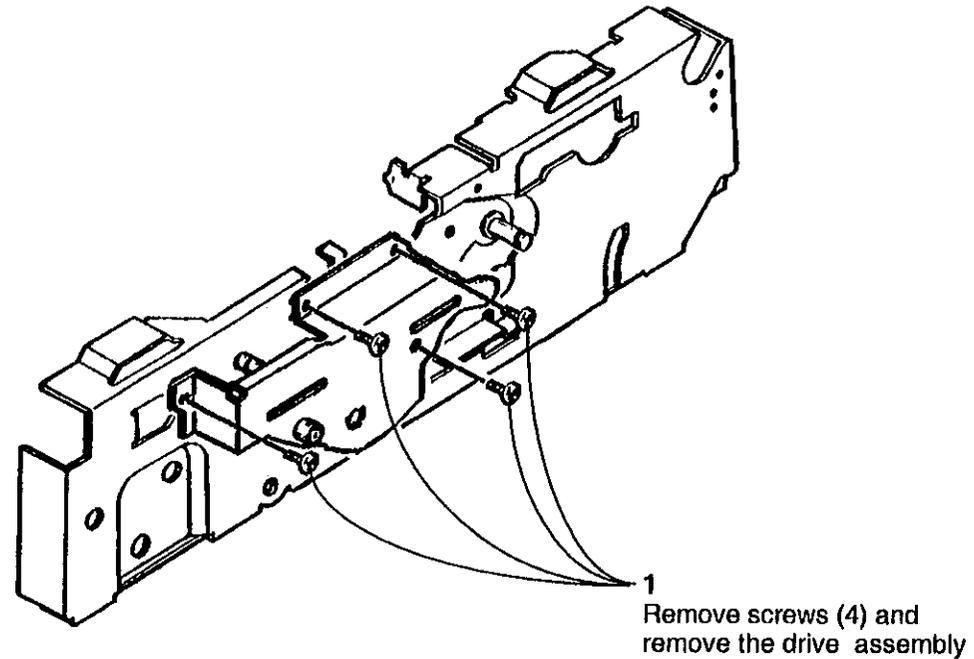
Removing the Fuser / Paper Transport Drive Assembly
